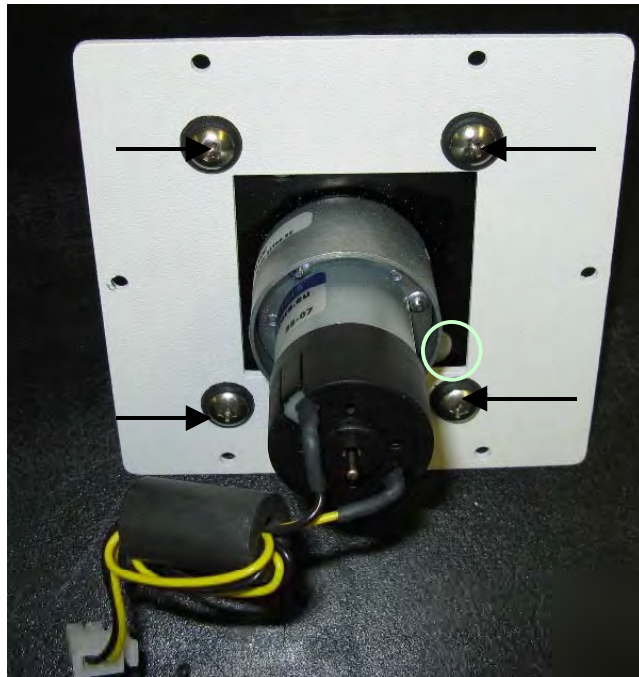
New pump in mounting plate. Note the hole for the ground wire mounting screw.
